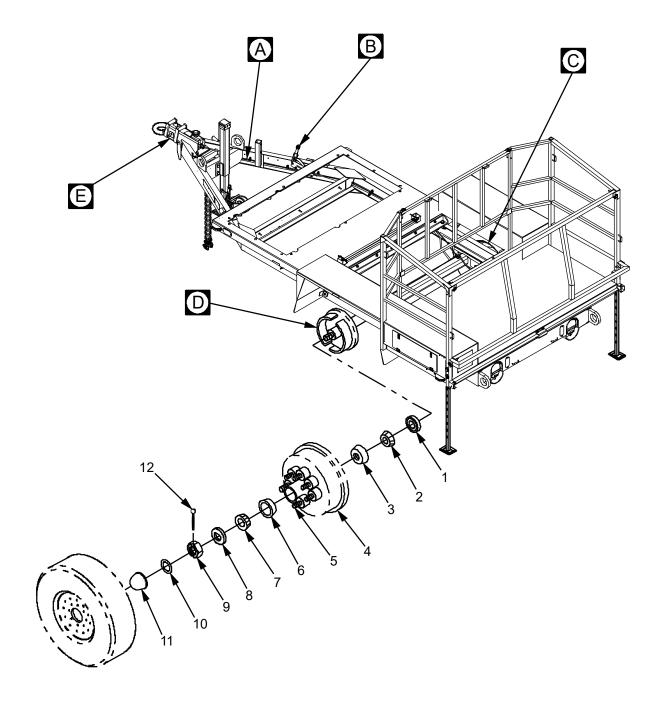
Chassis - Brake Installation, TG421-9006G, TG421-9006T (Sheet 1 of 5).
